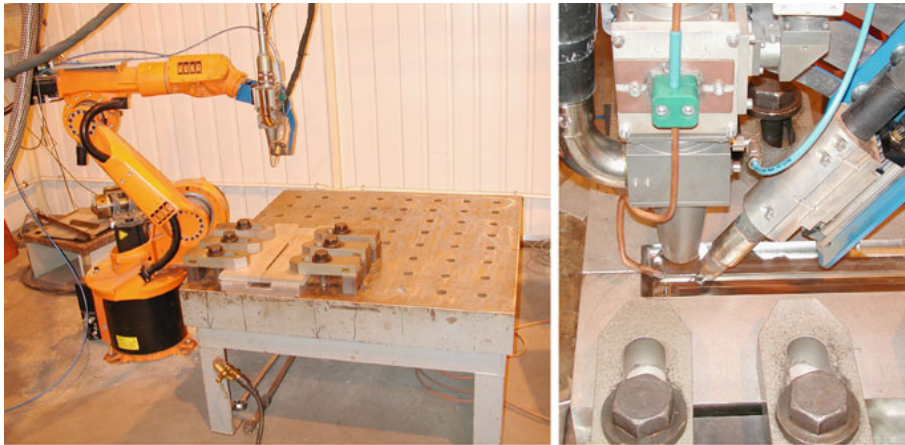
Left*: The lay-out of the experimental set-up. *Right*: Close-up from the hybrid welding head configuration
